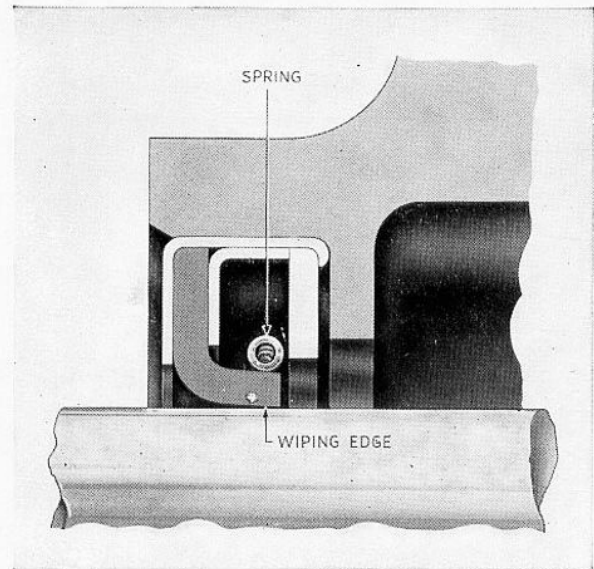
SECTION THROUGH OIL SEAL IN POSITION
